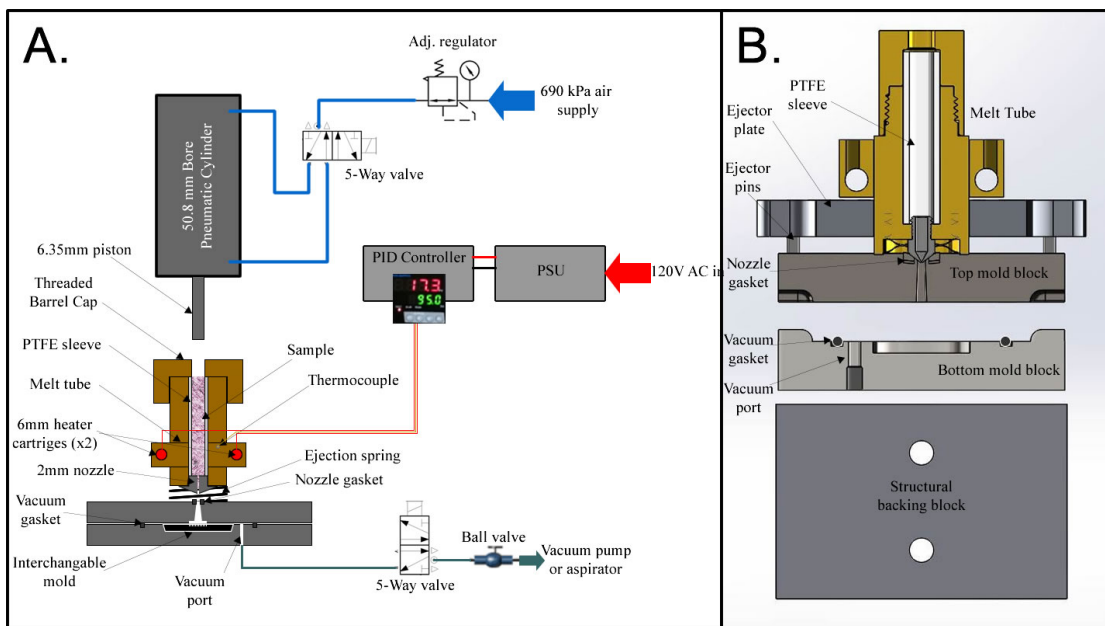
Injection molding system design - A) Schematic representation of injection molding system, B) computer aided drafting cross sectional model of critical design elements in the injection molding system
